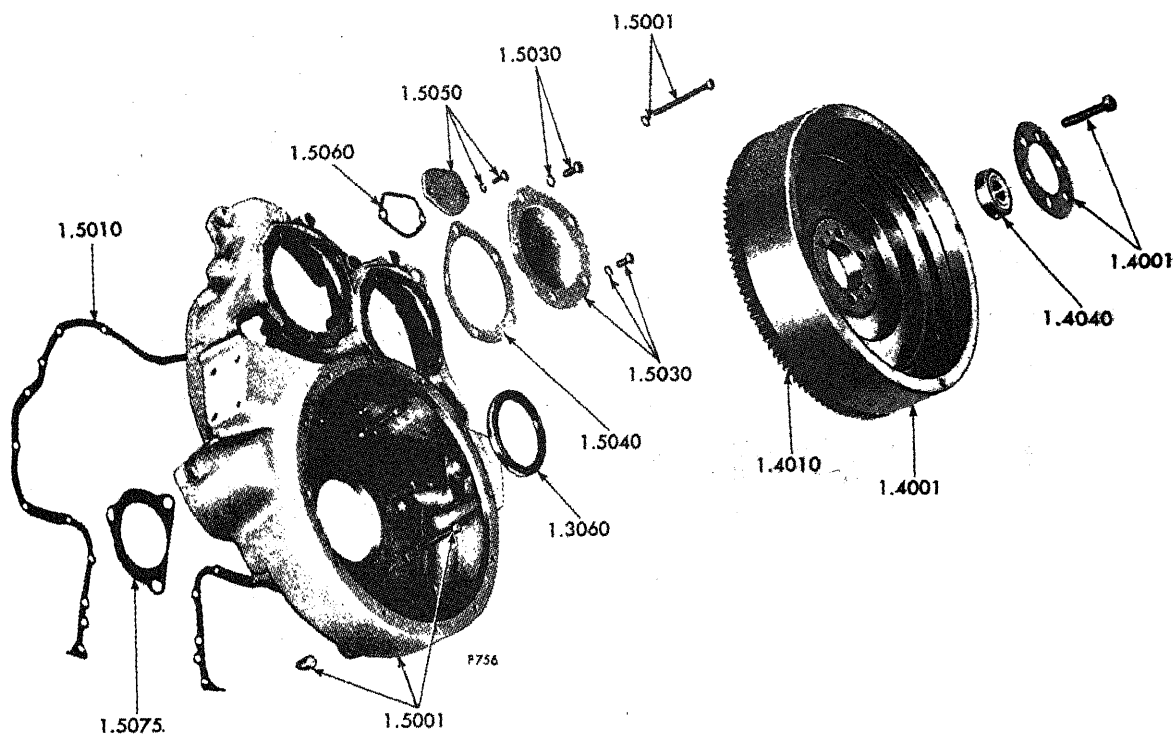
A FLYWHEEL AND FLYWHEEL HOUSING (In-Line Models)
